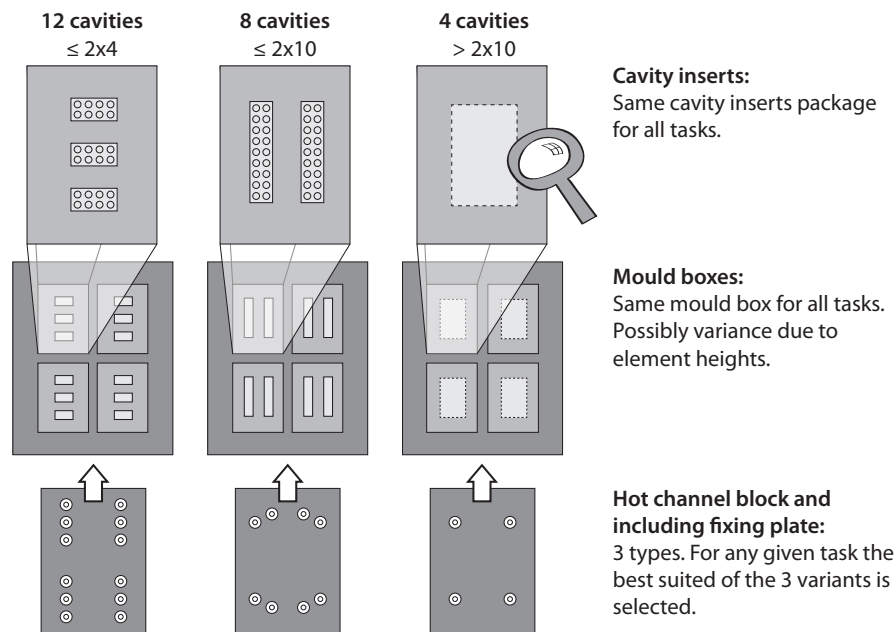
The development of the Module Mould platform was optimizing the mould boxes for a maximum number of cavity inserts that could be reused across different mould box sizes.
